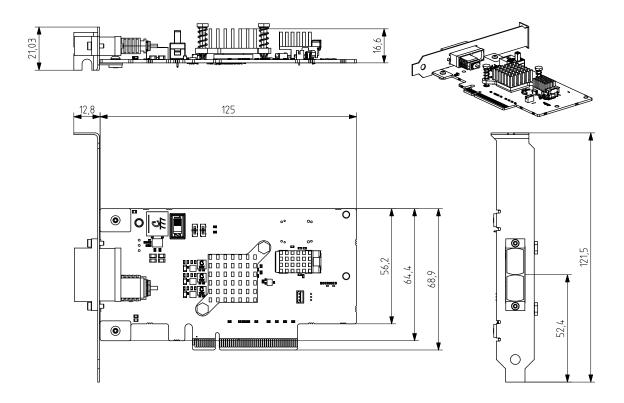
Dimensional drawing of HA-1P-X4G3-MTP-X8G3 host adapter
